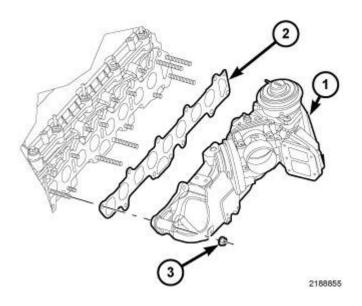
Identifying Manifold Retaining Nuts, Intake Manifold & Intake Manifold Gasket Courtesy of CHRYSLER LLC
